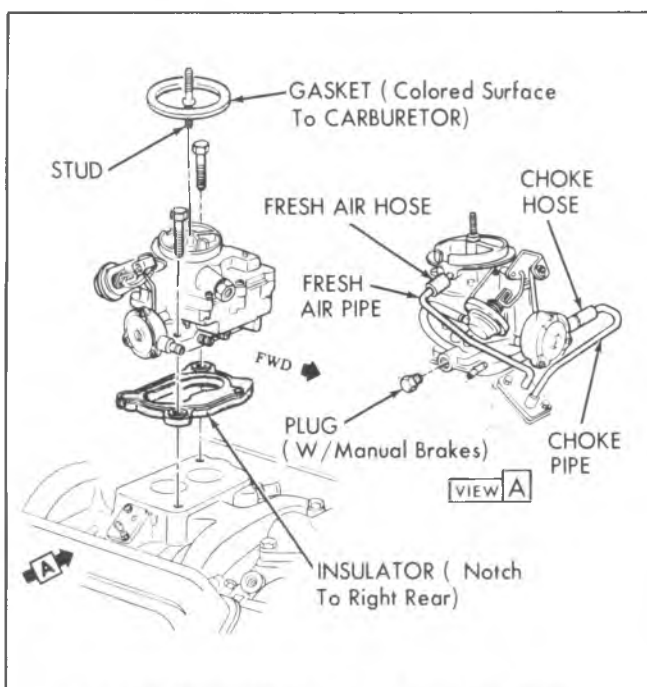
Carburetor and Choke Pipes, V8, 2Bbl.
